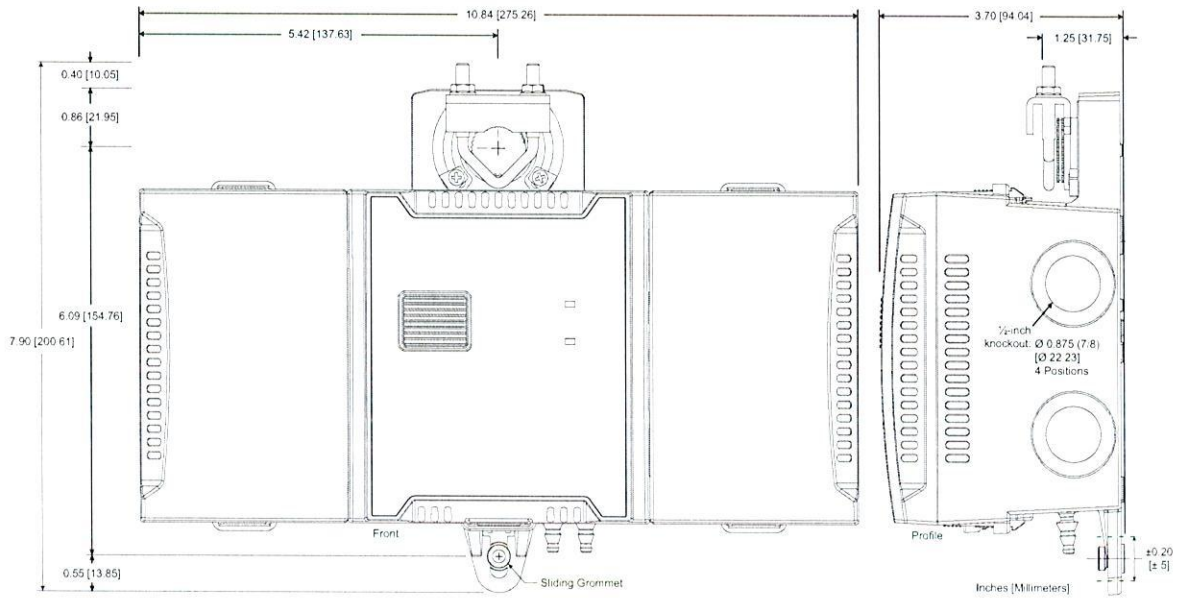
ECB-VAV Controller with Terminal Covers Dimensions
